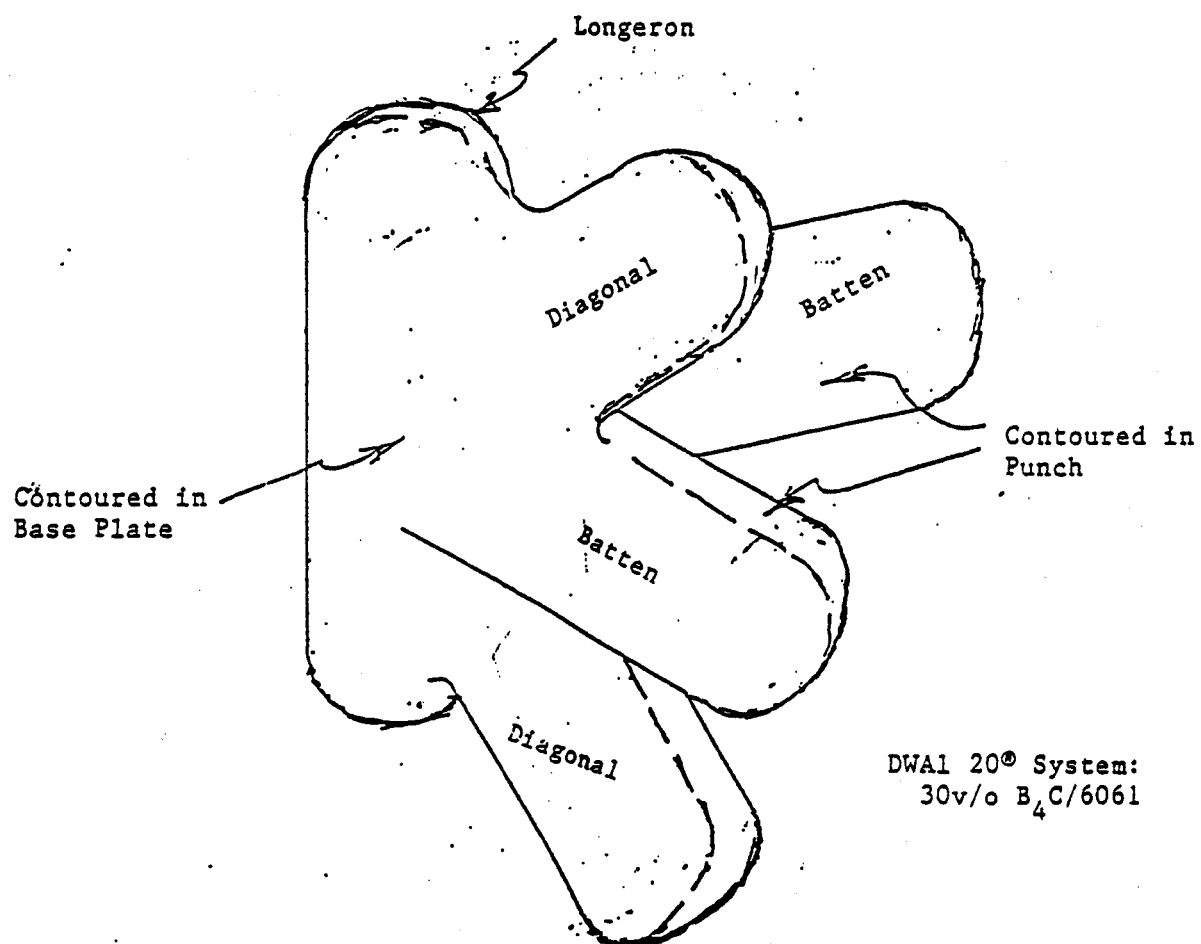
Rigid, Multi-appendaged, DWAl 20 End Fitting Configuration, Forged, Before Machining.
